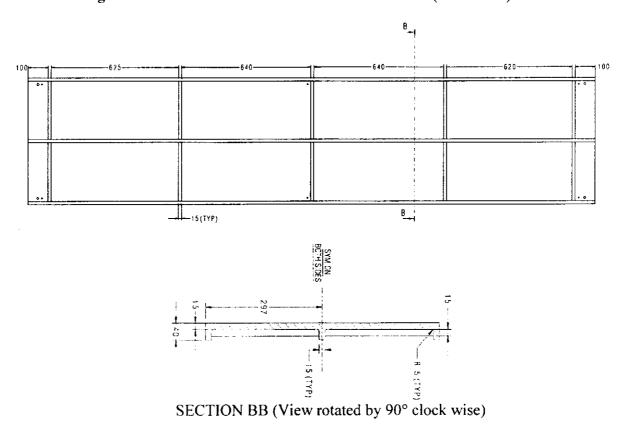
Other views & dimensional details of access cover out-board (LH & RH) tool
